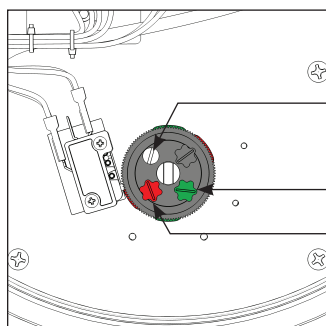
Indicator rotor pulled up from the indicator shaft.
